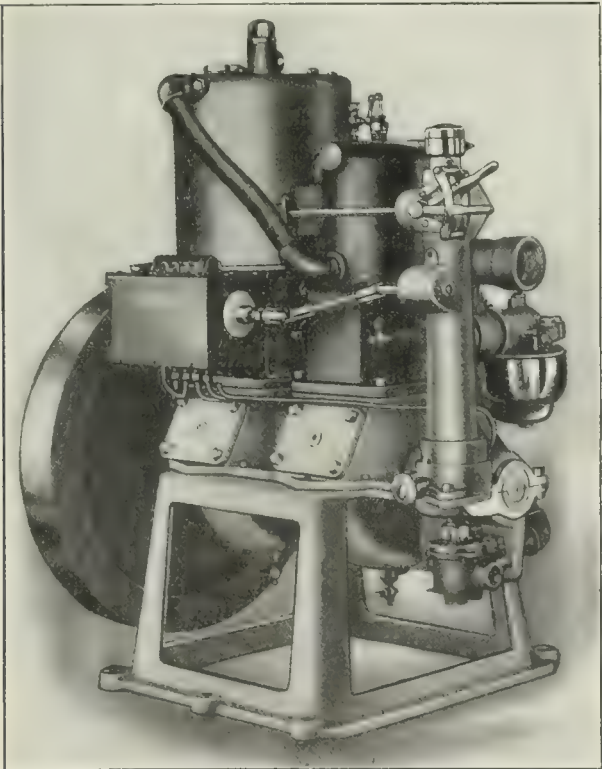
The Oiling Side of a New Air Compressor Built by the Roberts Motor Company, Sandusky, Ohio
